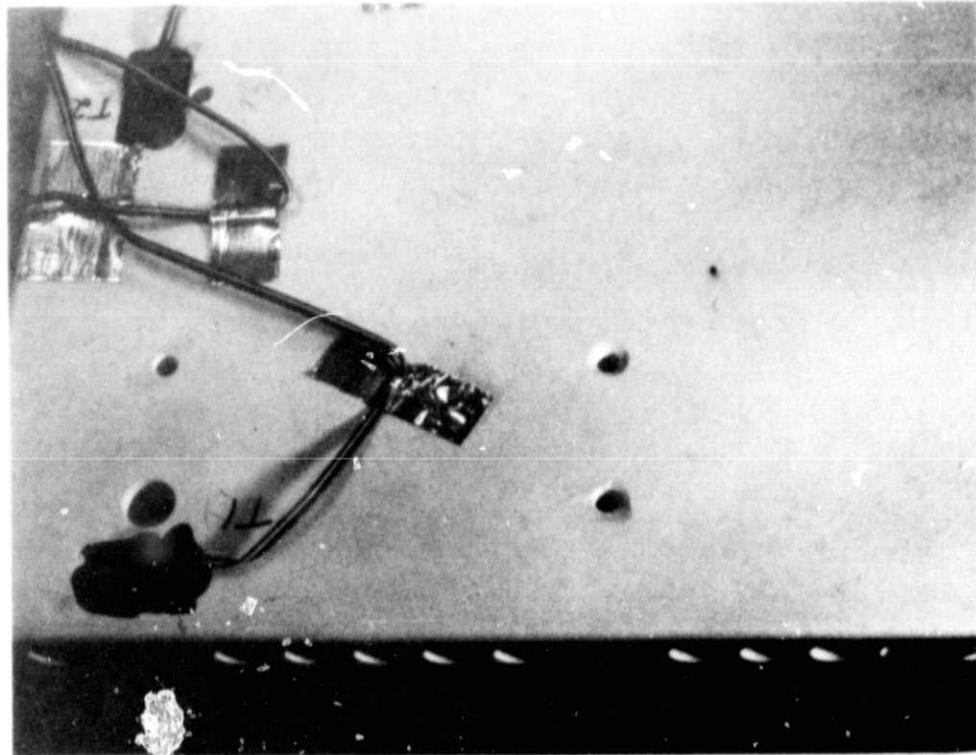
PHOTOGRAPH OF SEVERAL HAND-CHAMFERED HOLES
